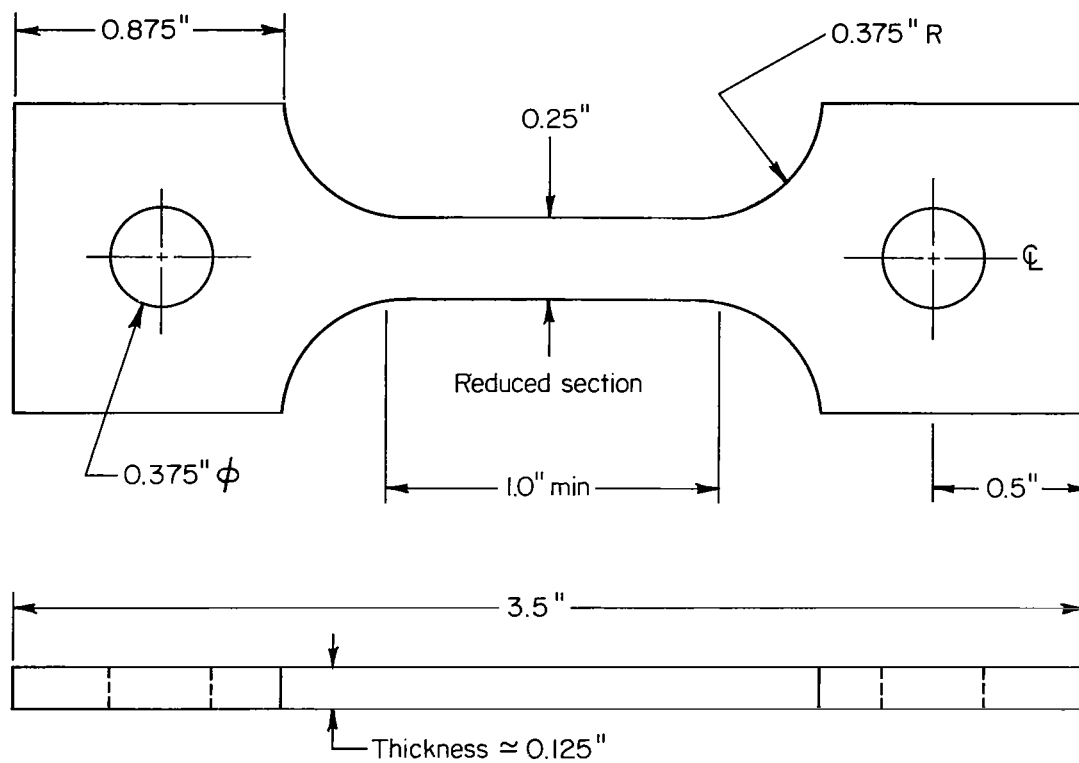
SPECIMEN GEOMETRY, SHEET TENSILE AND SHEET CREEP SPECIMENS
